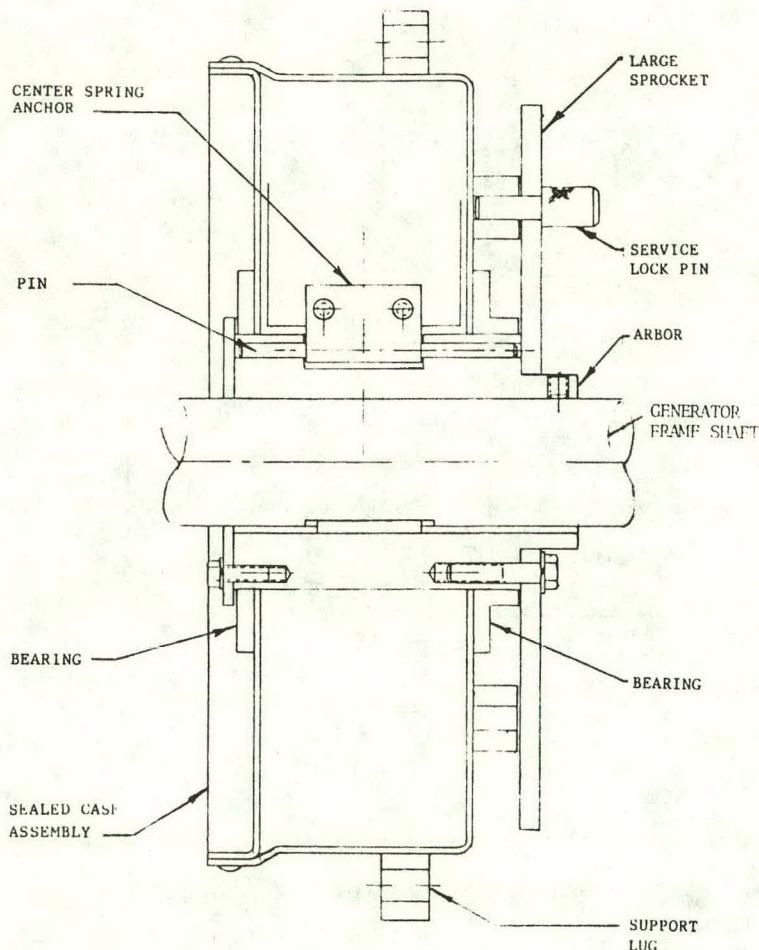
GENERATOR BALANCE SPRING ASSEMBLY
